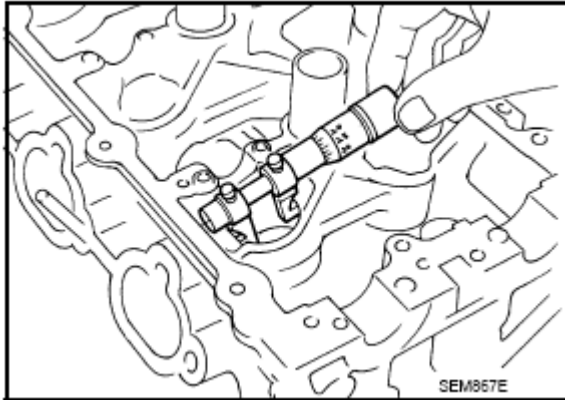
Measuring Inner Diameter Of Valve Lifter Hole Of Cylinder Head Using Micrometer
